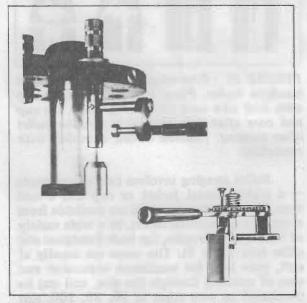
Core cutting tools range from elaborate mount-on units like the Hollywood cutter (top) to simple bench devices like the Herter cutter (bottom).
